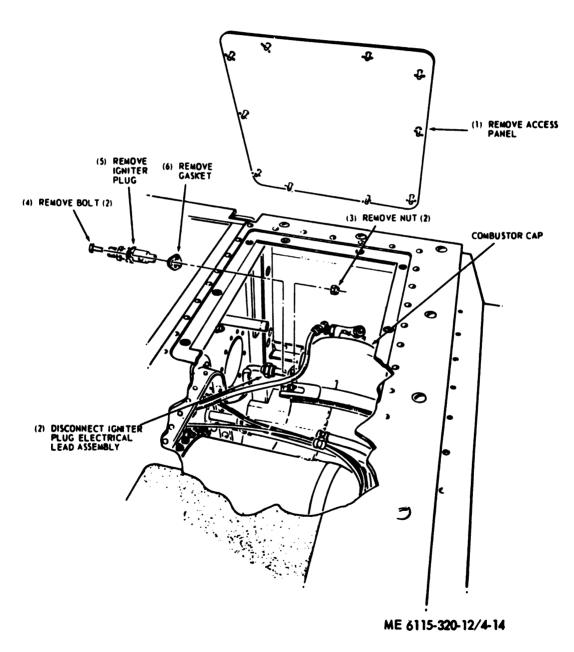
Igniter plug, and igniter plug electrical lead assembly, removal and installation.
